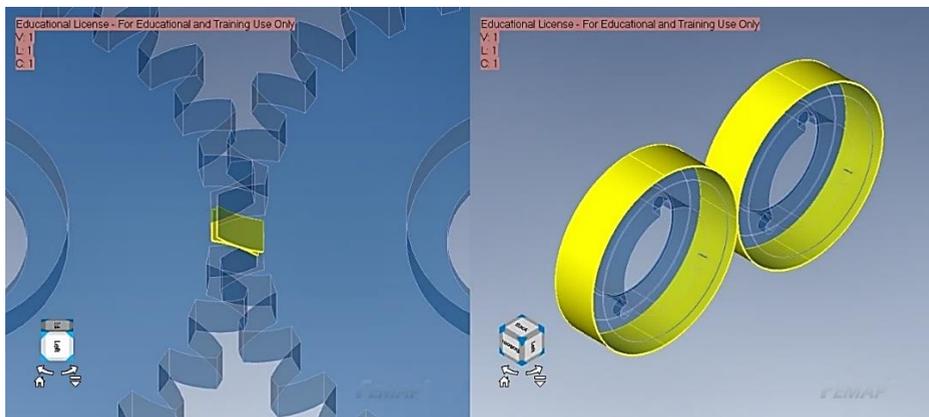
Location of places where loads are applied on gear wheels and working rollers.
